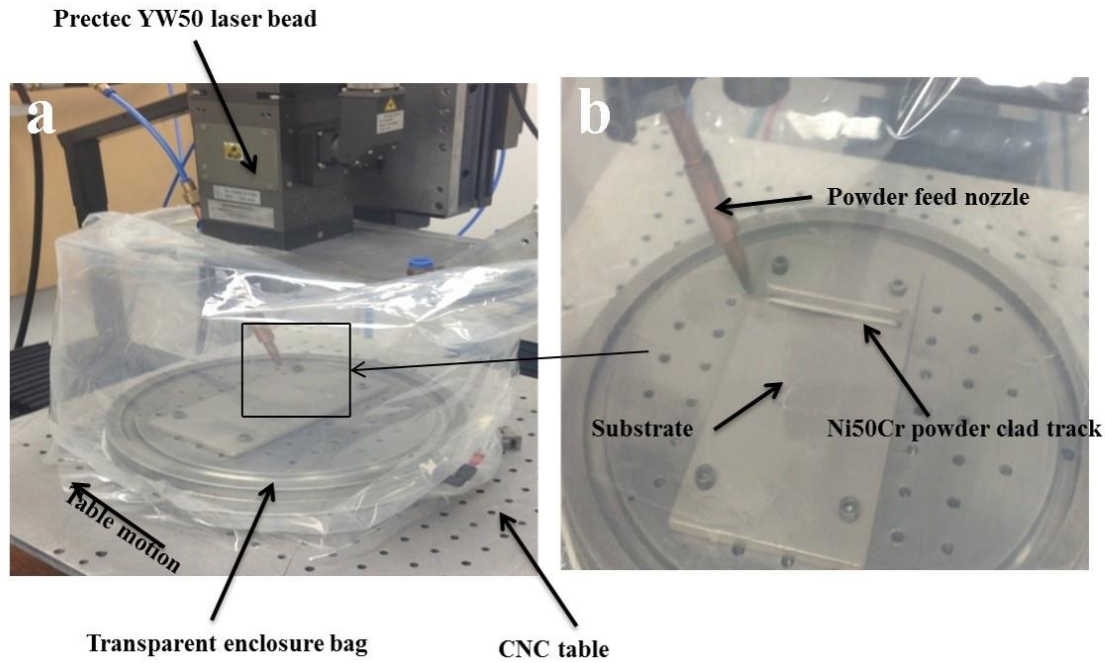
Laser cladding deposition of Praxair powder setup: (a) entire setup including the laser bead, CNC table and enclosure bag; (b) deposited clad track on the substrate.
